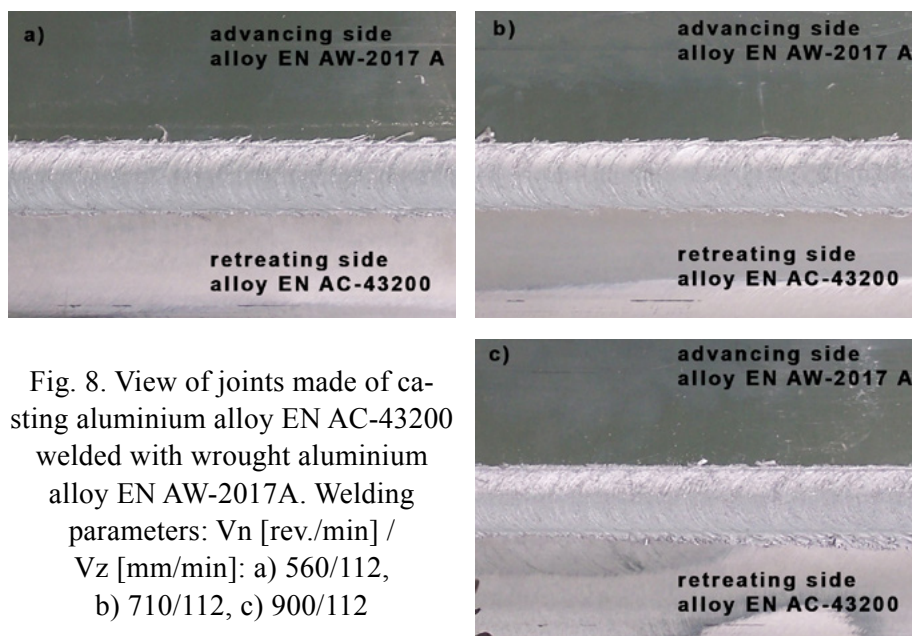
View of joints made of casting aluminium alloy EN AC-43200 welded with wrought aluminium alloy EN AW-2017A. Welding parameters:  $V_n$  [rev./min] /  $V_z$  [mm/min]: a) 560/112, b) 710/112, c) 900/112
